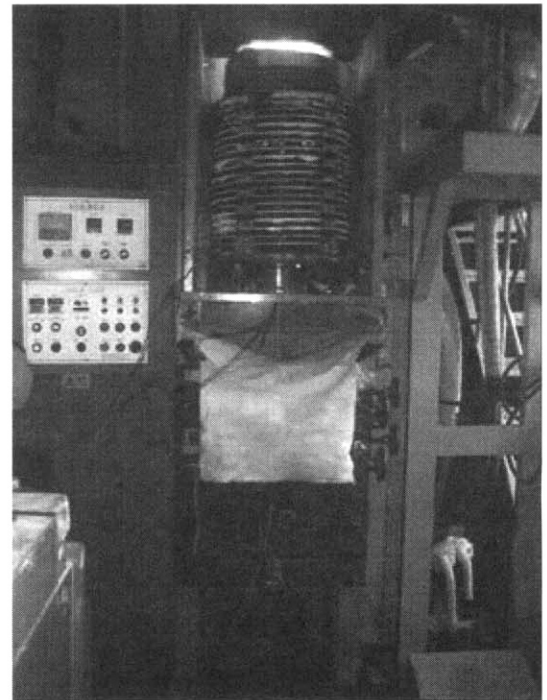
Continuous casting equipment for fabrication of small cross section nickel silver alloy wire.
